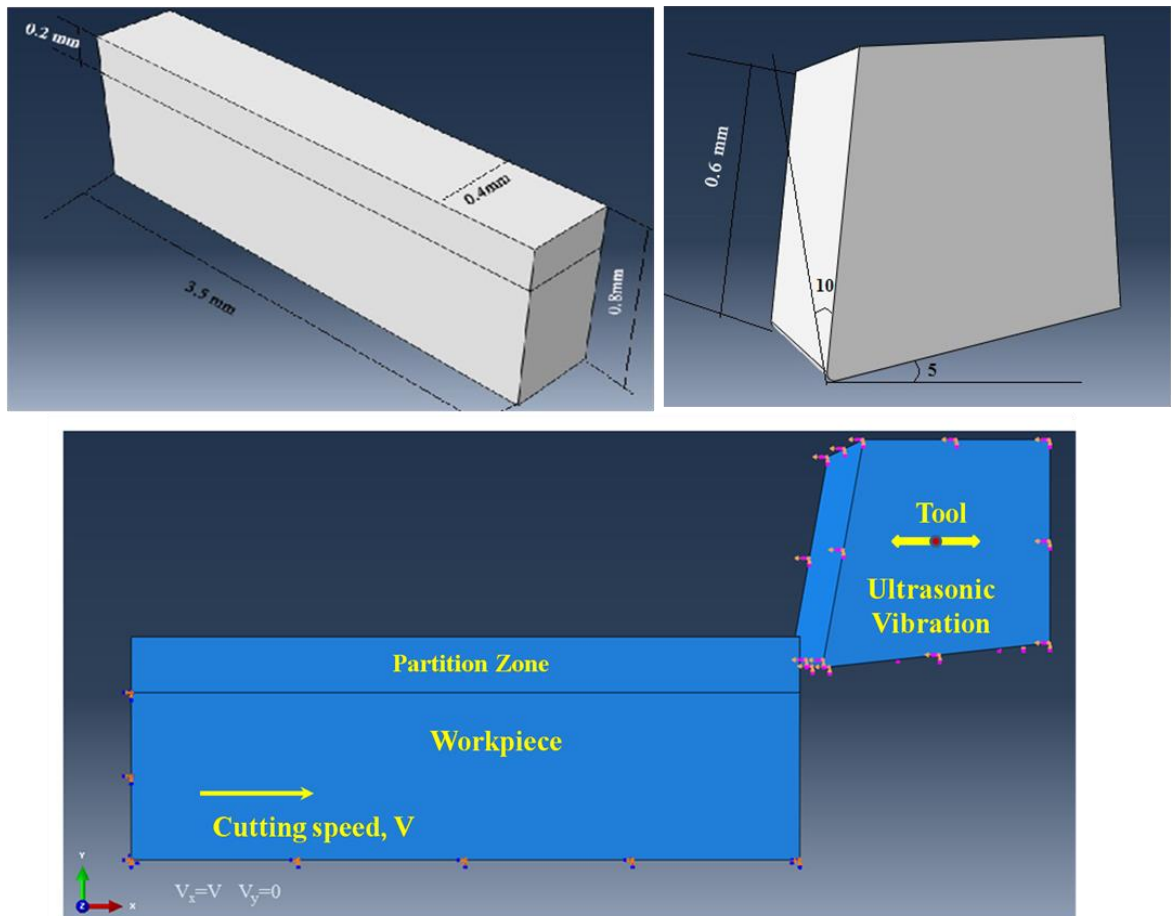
Modeling and relative movement of workpiece and cutting tool
